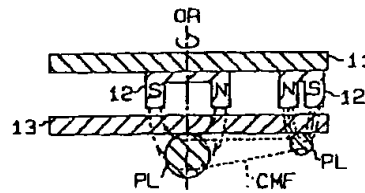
Cross-sectional view illustrating the relative positions of the magnet assembly and the target.
